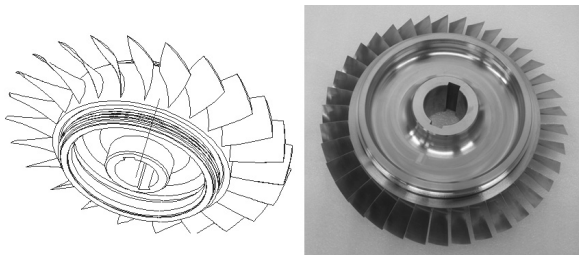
1st rotor 3D model and Blisk Type Test Piece
